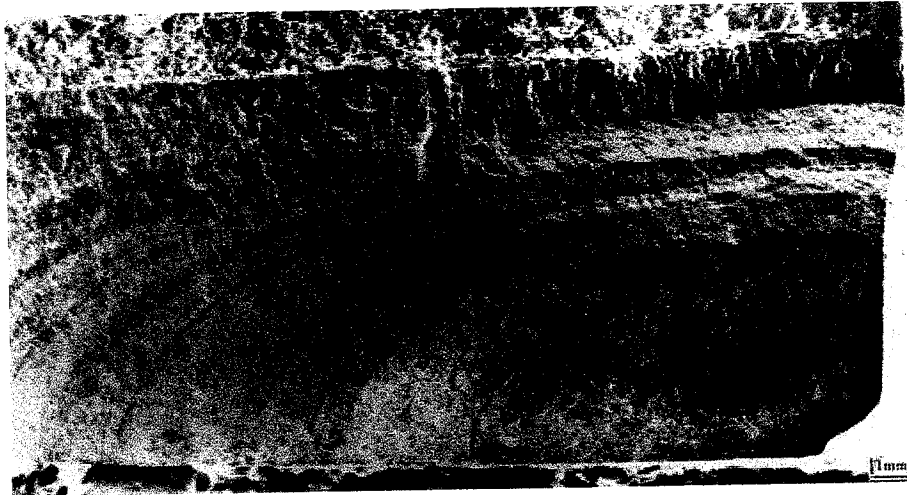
Fracture surface of one of the cracks in disc 1. The inside surface of the hole is shown vertically on the right hand side of the picture. The bottom edge of the picture is the front surface of the disc with the centre of the disc towards the left hand side of the picture.
